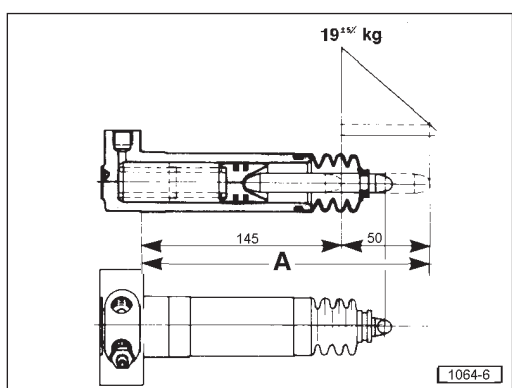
Clutch assembly hydraulic operating cylinder.
